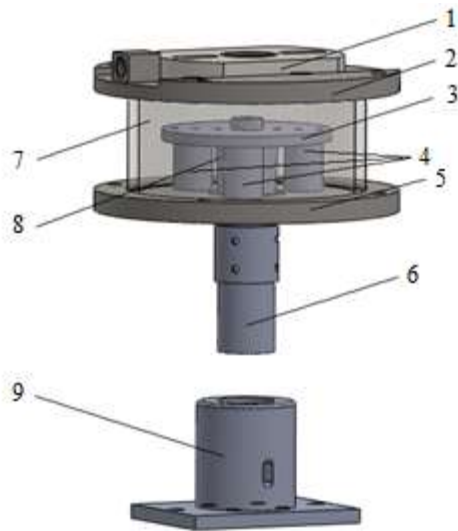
The passive compliance device with porous rubber elastic elements: 1 – device holder, 2 – top cover, 3 – metallic plate, 4 – elastic rubber elements, 5 – bottom cover, 6 – shaft, 7 – body, 8 – central elastic element of angular compliance, 9 – bushing
